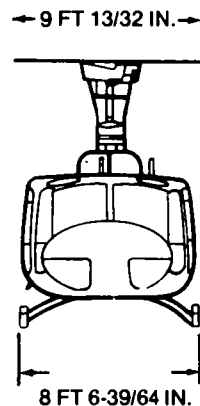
Principal Dimensions, EH-1X (Quick Fix II)
